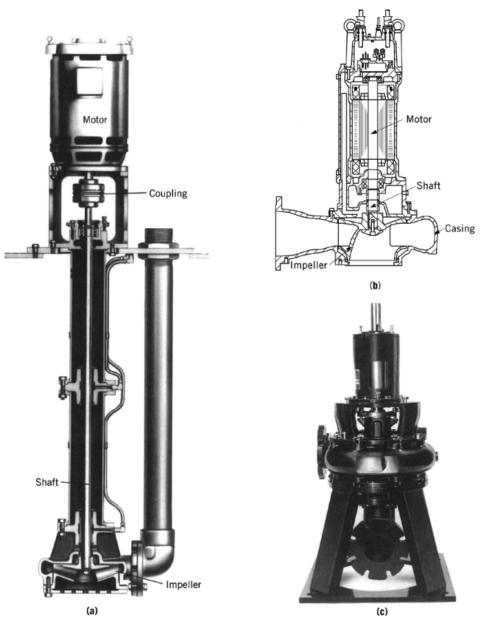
(a) Wet-pit pump design. Courtesy of Goulds Pumps, Inc. (b) Submersible pump. Courtesy of Homa Pump Technology. (c) Dry-pit pump.(Courtesy of Patterson Pump Co.)
